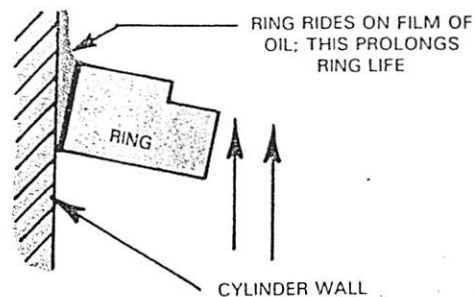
On compression and exhaust strokes rings tip and slide easily on a film of oil.
